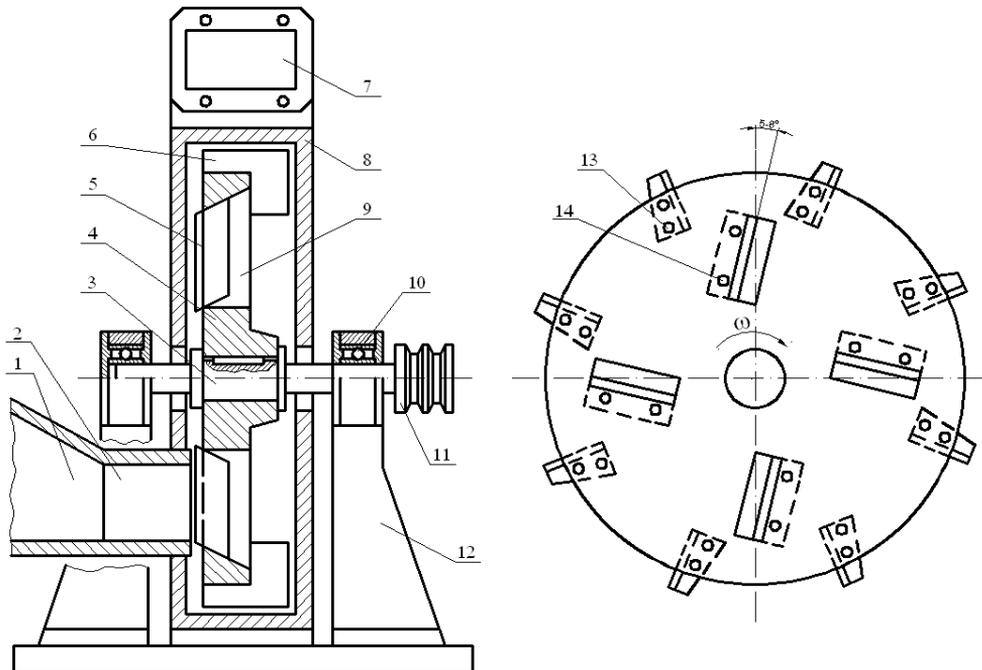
Disc chipper working unit: 1 – feed chute, 2 – throat, 3 – shaft, 4 – disc, 5 – knife, 6 – blade, 7 – chips outlet collector, 8 – body, 9 – knife slot, 10 – bearing, 11 – drive wheel, 12 – chipper frame, 13 – blade mounting bolt, 14 – knife mounting bolt (Gendek and Więsik, 2015)
